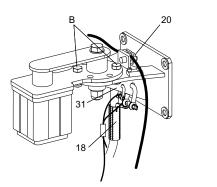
Top fixation bracket with lifting and safety wires and cable sock
